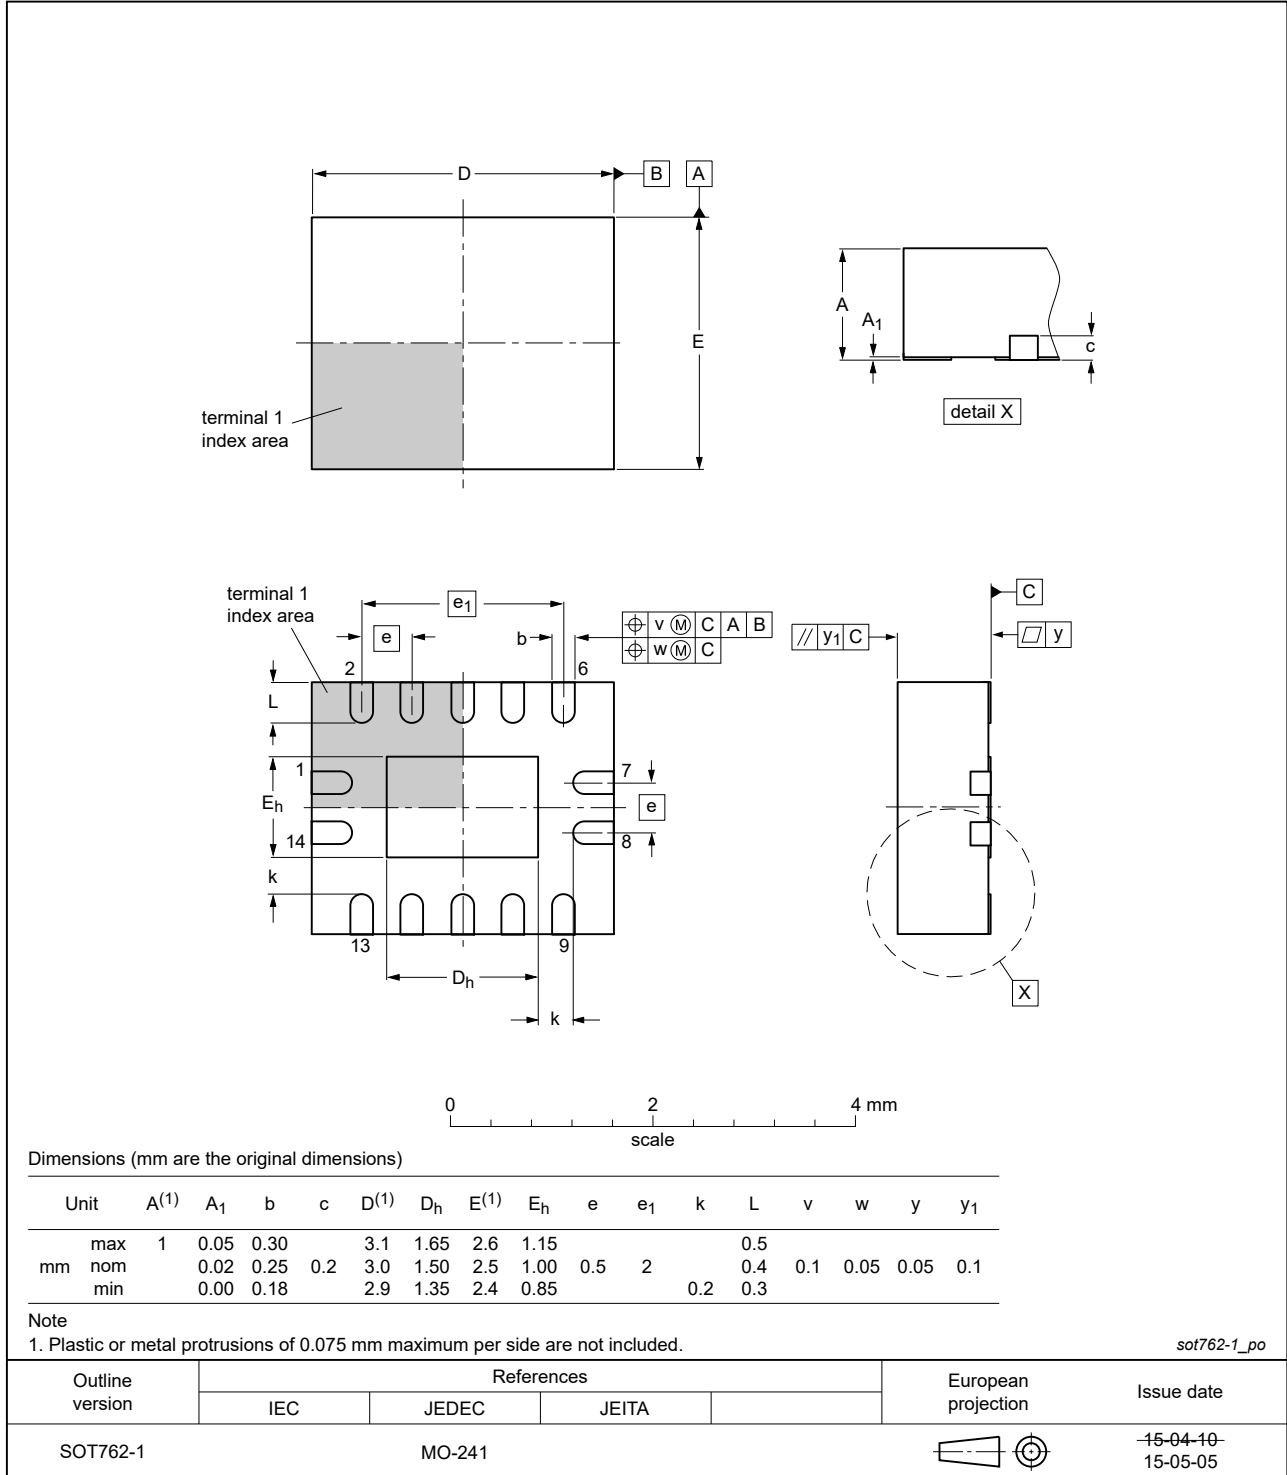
Package outline SOT762-1 (DHVQFN14)
